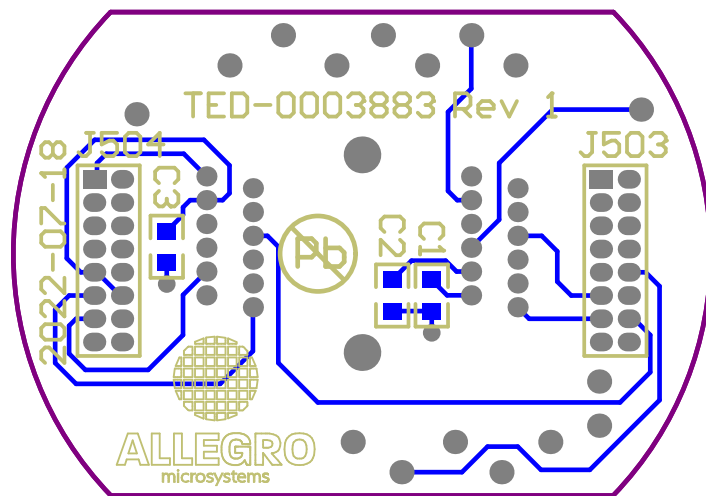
A33022 Socketed Dual Die Granddaughter Board
